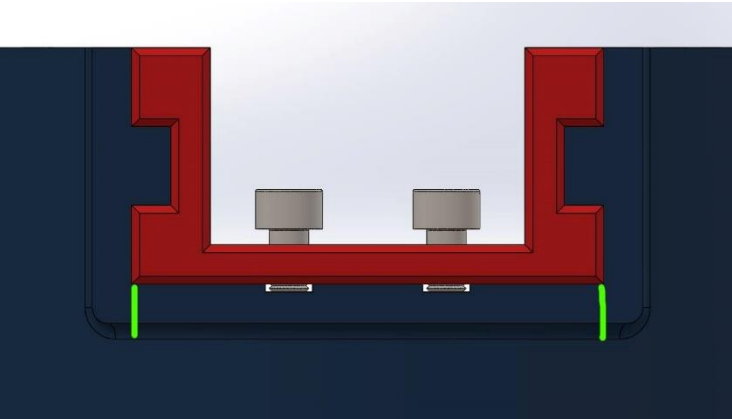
Direct view on the arm system with emphasized welds.
